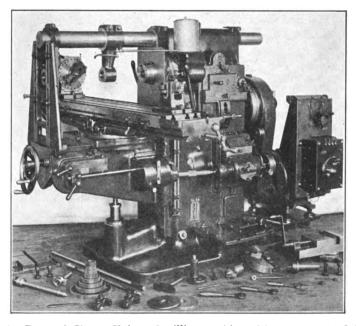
Brown & Sharpe Universal milling machine with constant speed drive.
